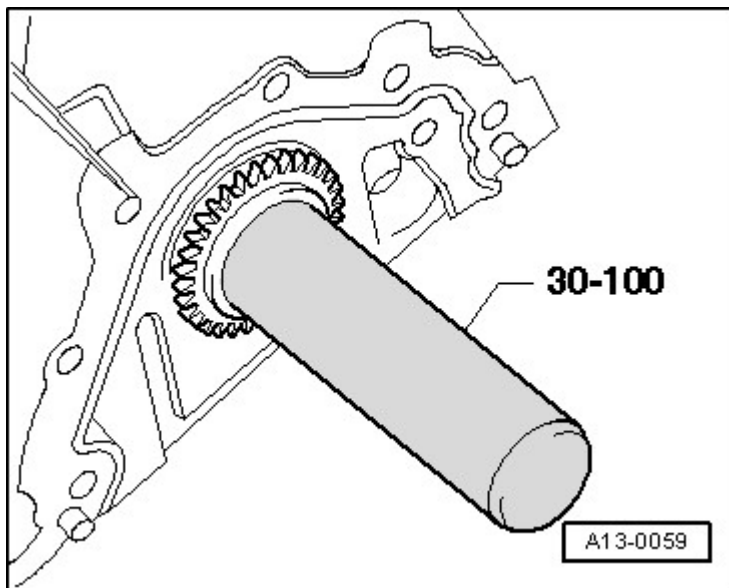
Installing Chain Sprocket Onto Crankshaft Up To Limit Stop Using Press Tube 30-100
